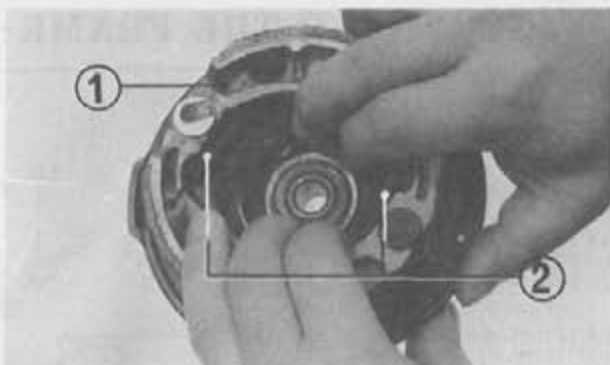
(1) Brake shoe (2) Brake shoe spring
